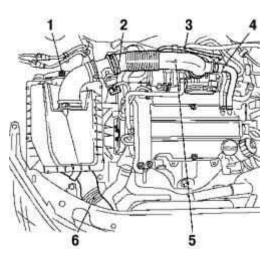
Components, shooting in the dismantling of the air filter: 1 - screw fixing the lower rubber support, 2 - wiring harness mass air flow sensor, and 3 - line of ventilation of the fuel tank, 4 - hose, ventilation motor, 5 - air intake hose, 6 - inlet pipe
